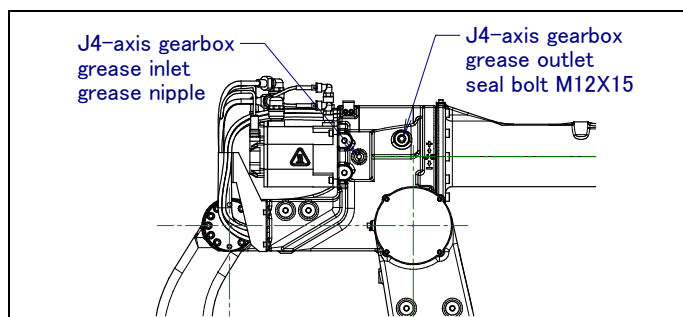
(b) Greasing point of J4-axis gearbox
